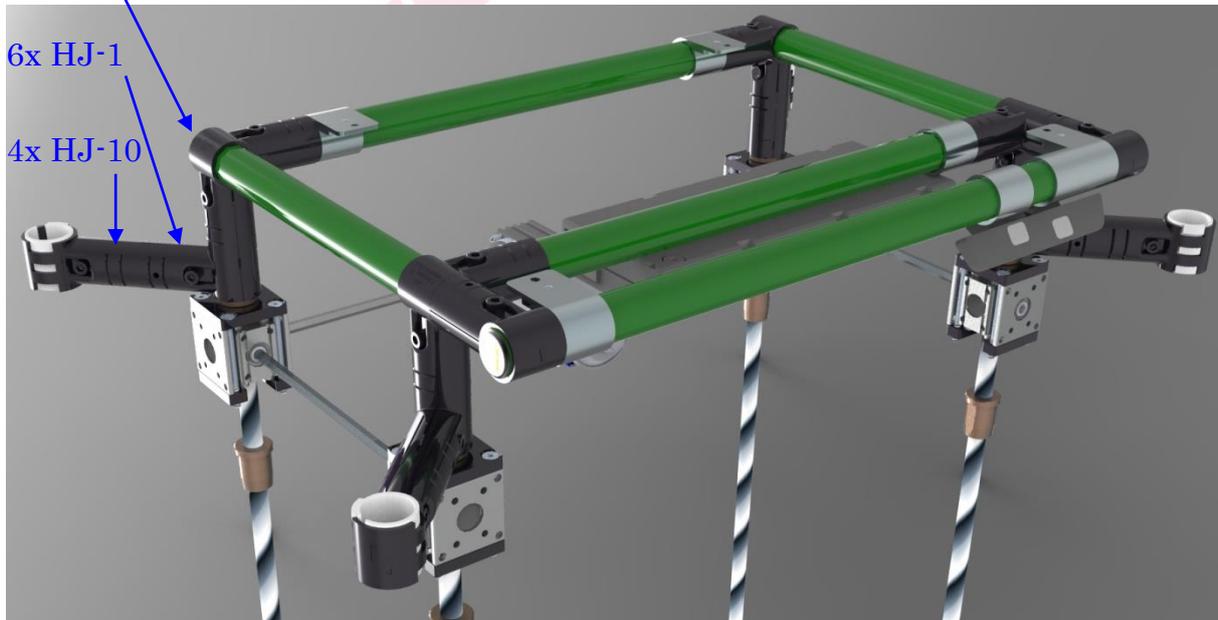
A: Example for a work station with height adjustable work table, electric drive with 220V
